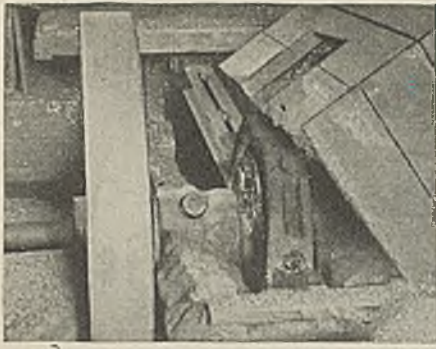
Cover Tipped Sidewise to Show Eccentric and Oil Pan Below
